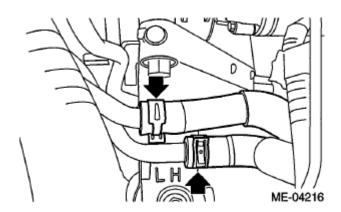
Locating Heater Inlet Hose And Heater Outlet Hose Courtesy of SUBARU OF AMERICA, INC.
